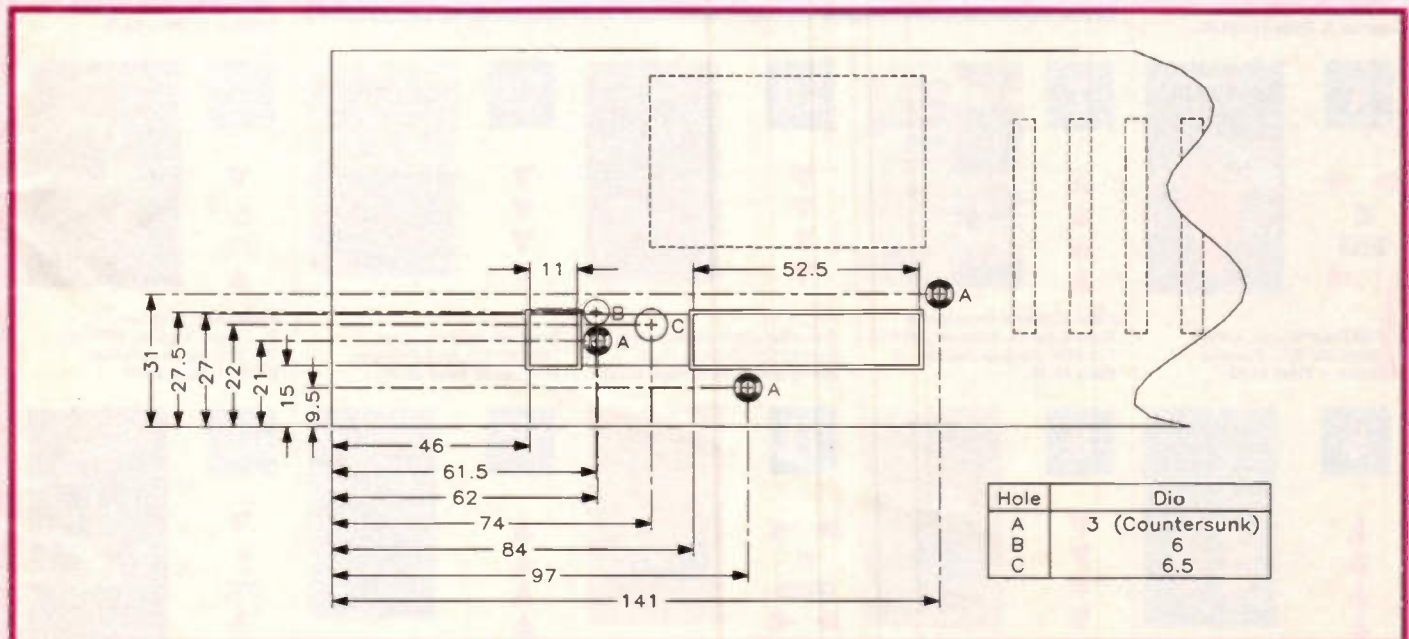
Front panel drilling for the switch assembly. Rectangular hole at left is for SW1, at right for SW2 to SW5. Hole C is for the front panel potentiometer.
